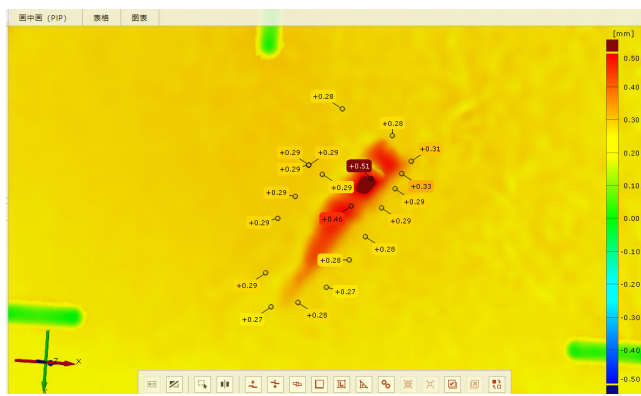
Surface inspection cloud of sprayed developer defective sheet metal part after performing cross-complementary holes1.
